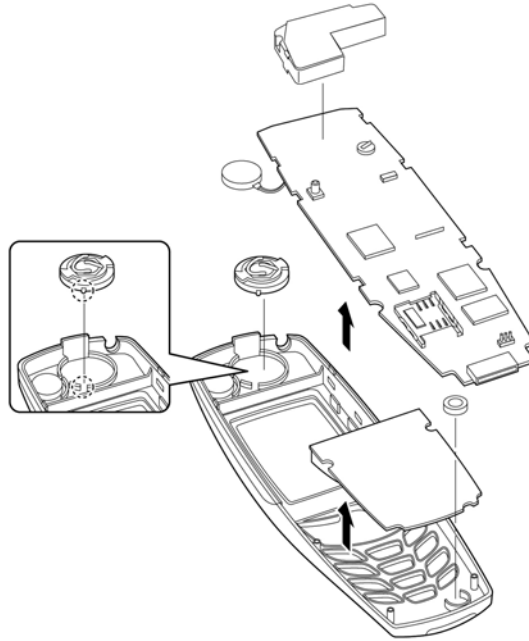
Removing PCB, Antenna, Receiver and Keypad.
